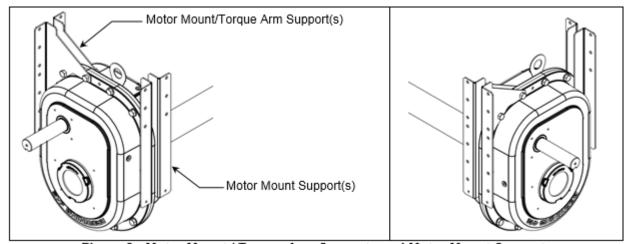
Motor Mount / Torque Arm Supports and Motor Mount Supports
